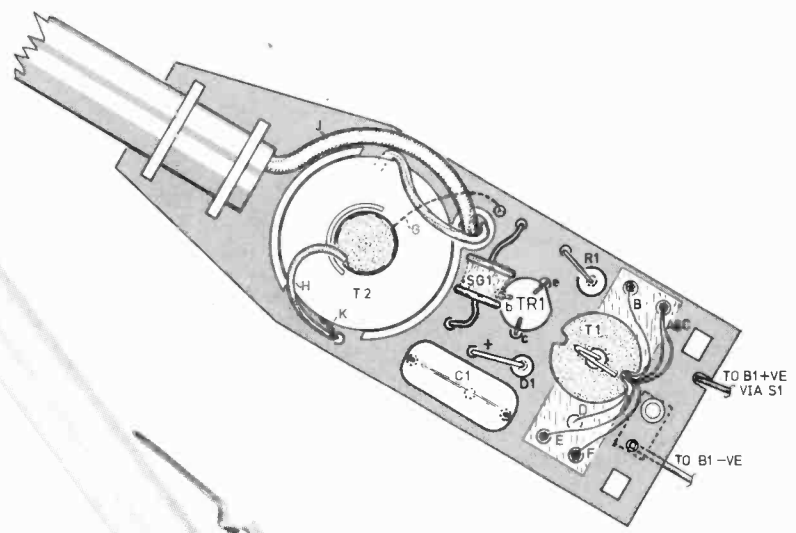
General layout, component details and p.c.b. master for the printed circuit version
